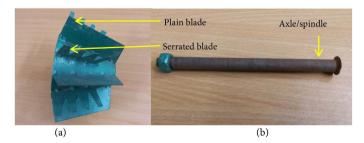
Photographic view of the rotor of the weeder with a plain, serrated blade, axle or spindle, and bush.
